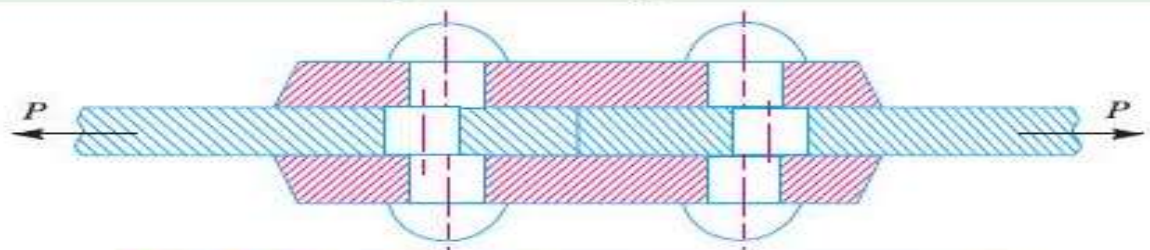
Shearing off a rivet in double cover butt joint.
